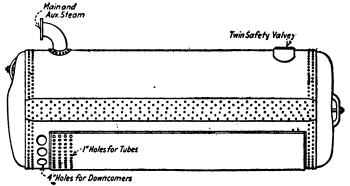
Side View of Steam Drum, White-Forster Boiler
